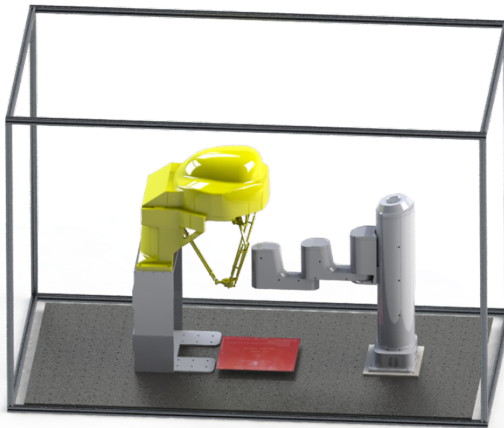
Concept 1 Featuring a FANUC Robot and a SCARA 3D Printer Configuration
